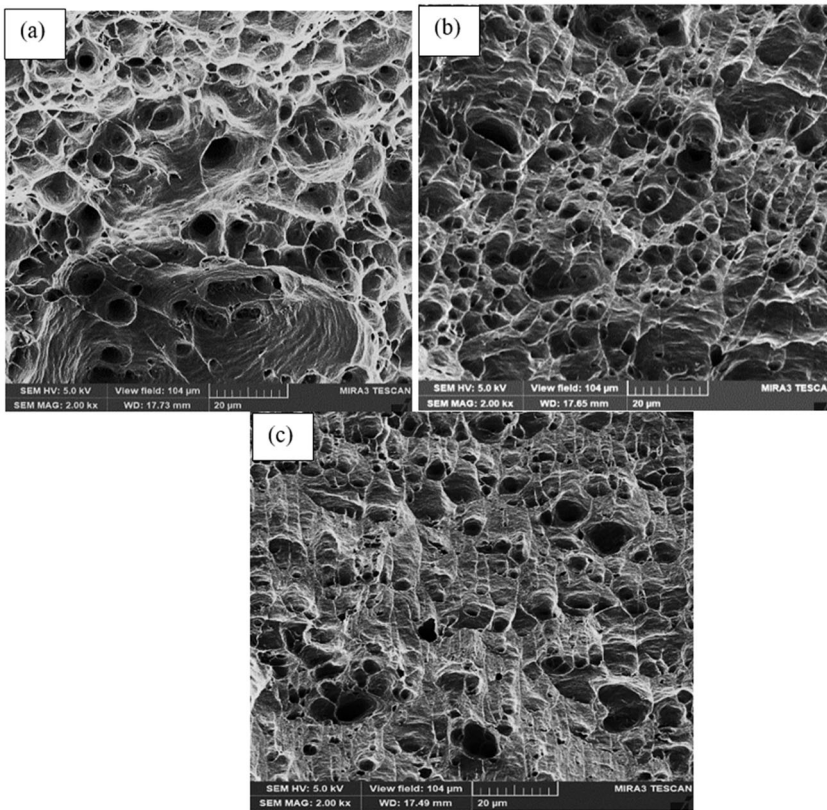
SEM tensile fractographs, (a) TIG welded joint, (b) FSPed-TIG welded AA6082-AA8011 joint, (c) FSPed-TIG welded AA8011-AA6082 joint.
